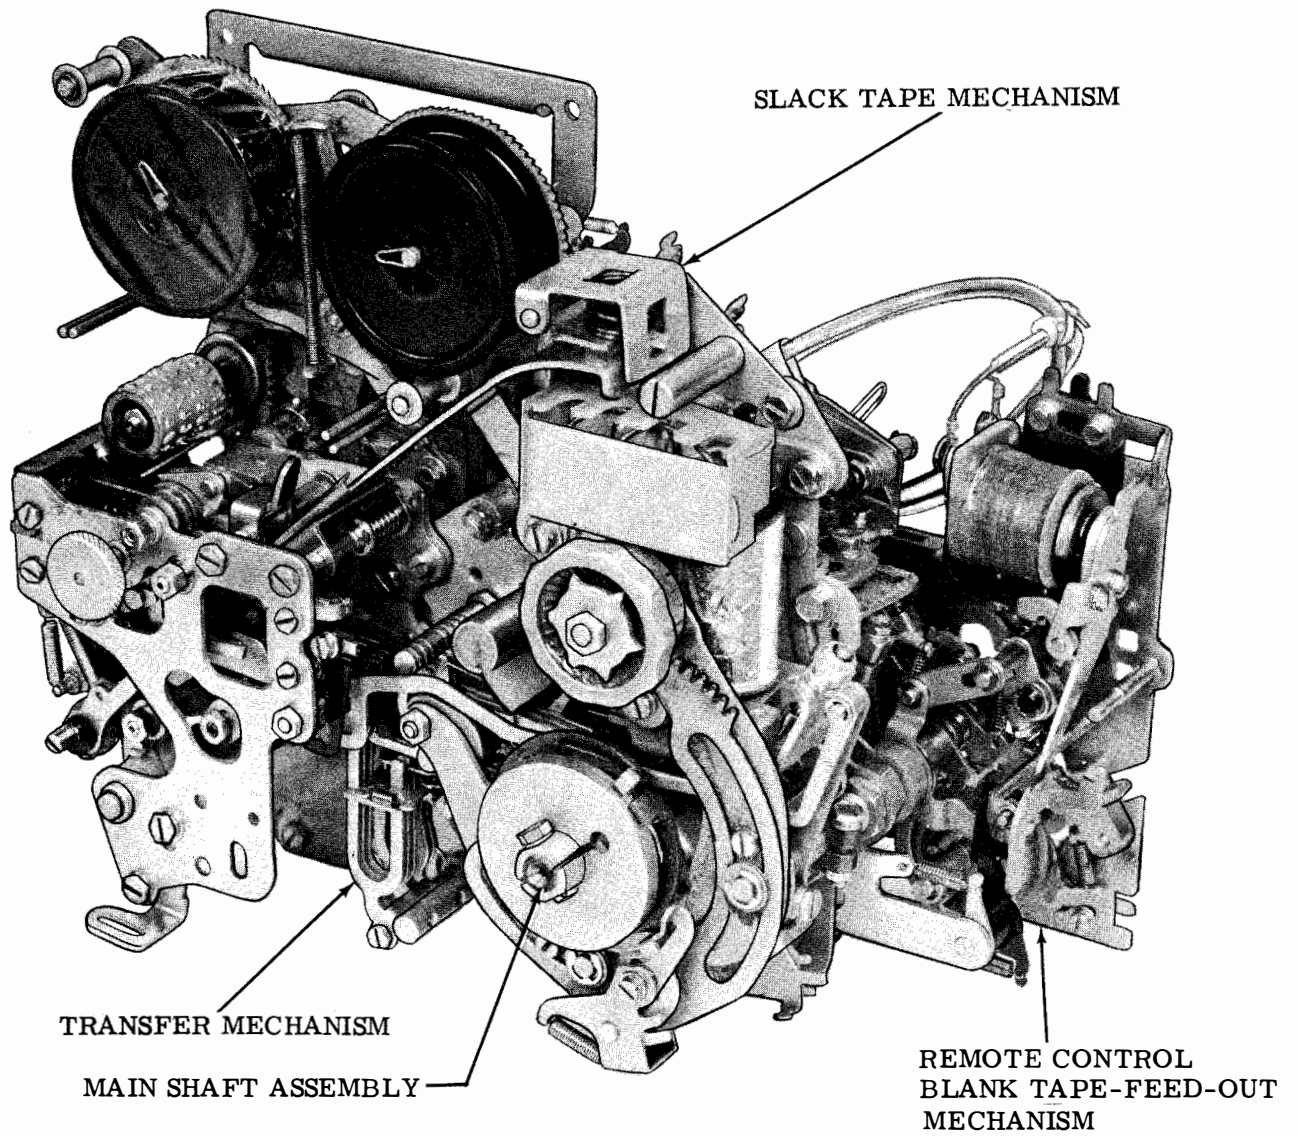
28 Typing Reperforator Unit With Remote Control BLANK Tape Feed-Out Mechanism (Fully Perforated Tape)
